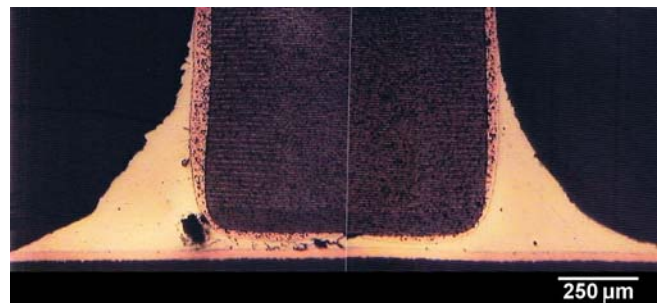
Cross section of a SnAg0.3Cu0.7 solder joint of a CC1206 component after 1000 cycles
